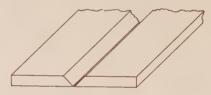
Showing Bevel Required for Acetylene or Metal Arc Welding
